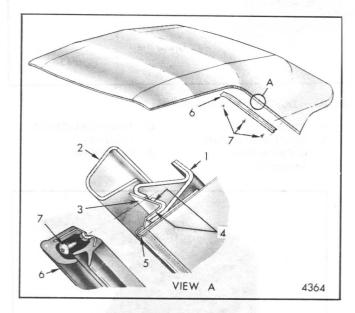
Side Roof Rail Rear Weatherstrip and Quarter Retainer Attachment
